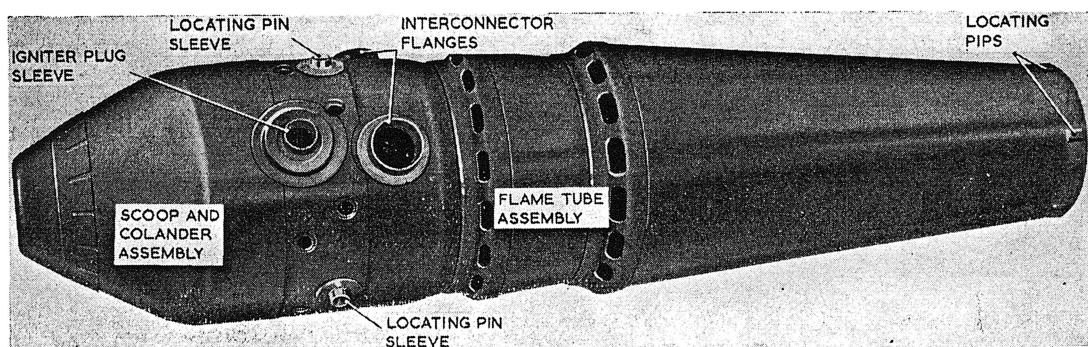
Flame tube assembly fitted to Goblin Mk. 2 and Mk. 3 pre-mod 820
